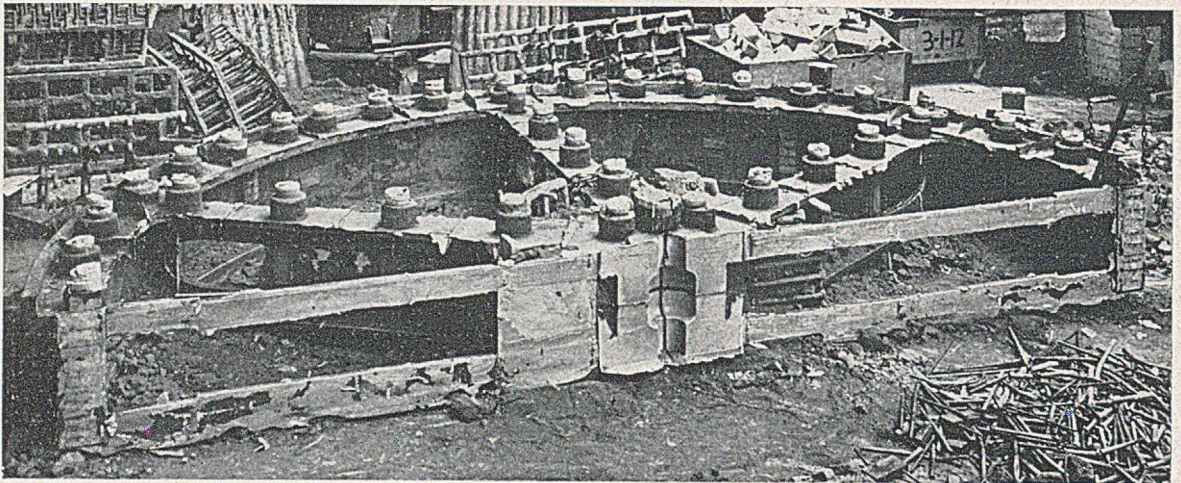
Half-wheel Casting stripped from the Mould, but with Feeders still attached. Note the Segmental Division of the Centre Boss by  $\frac{1}{2}$  in. Cores.
